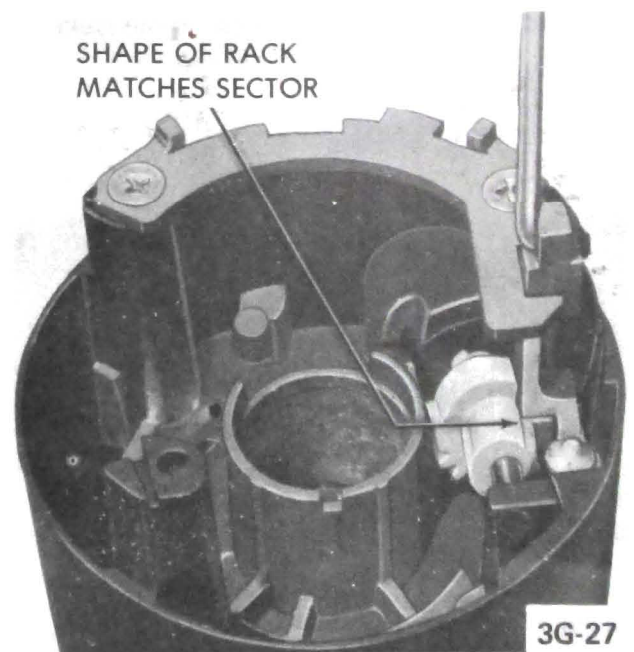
G-47 - Rack and Lock Bolt Assembled to Sector
